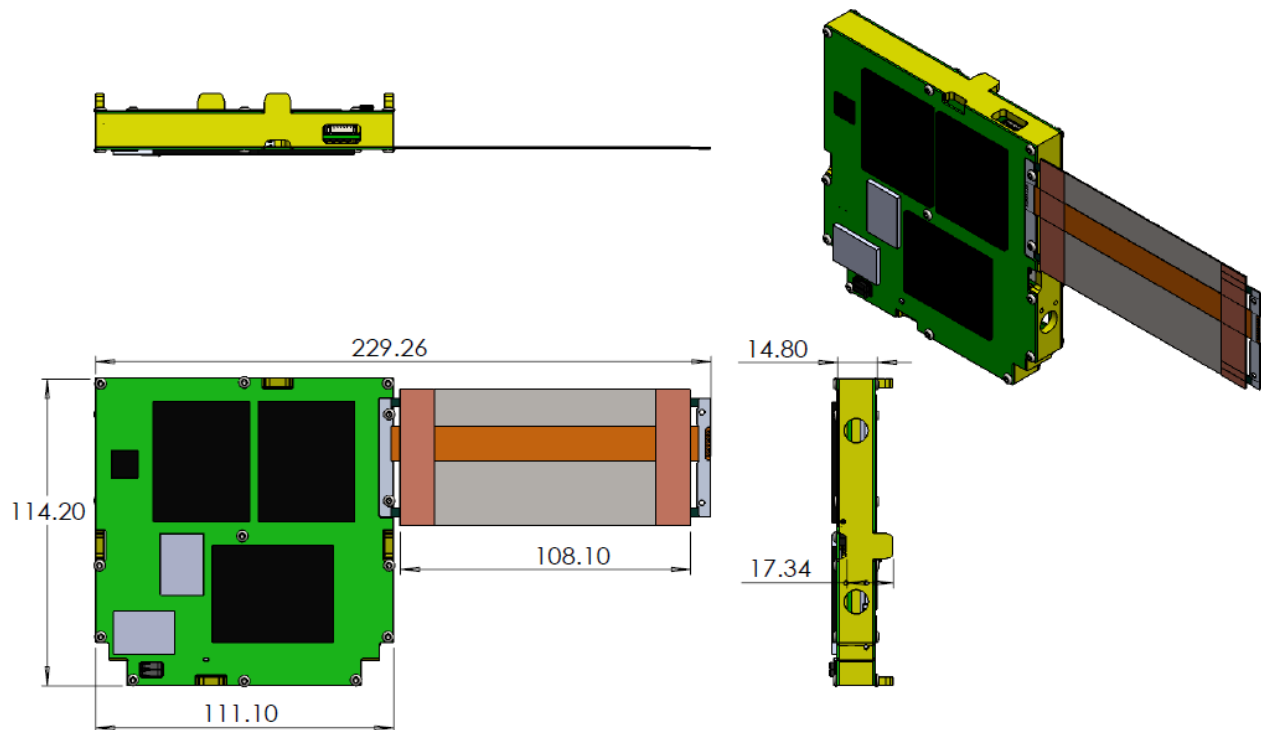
Single Frame ThinSat Unit (“1T”) Detail
